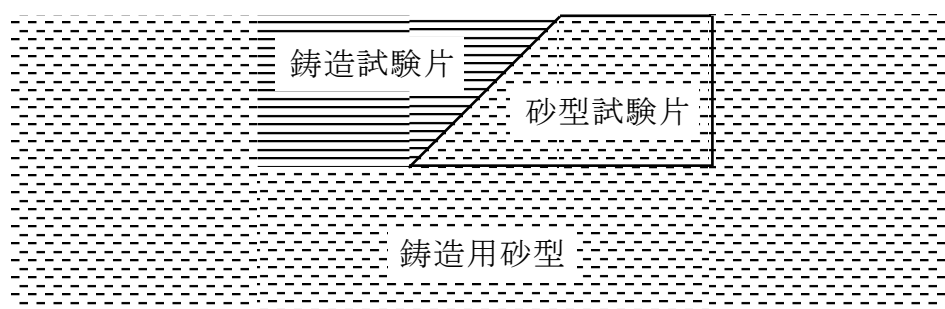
Schematic diagram of casting sand mold showing relationship between sand mold specimen and cast specimen.
